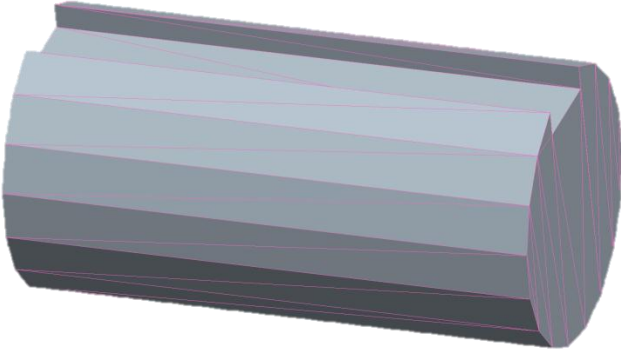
STL FILE OF CYLINDER WITH GROOVE
